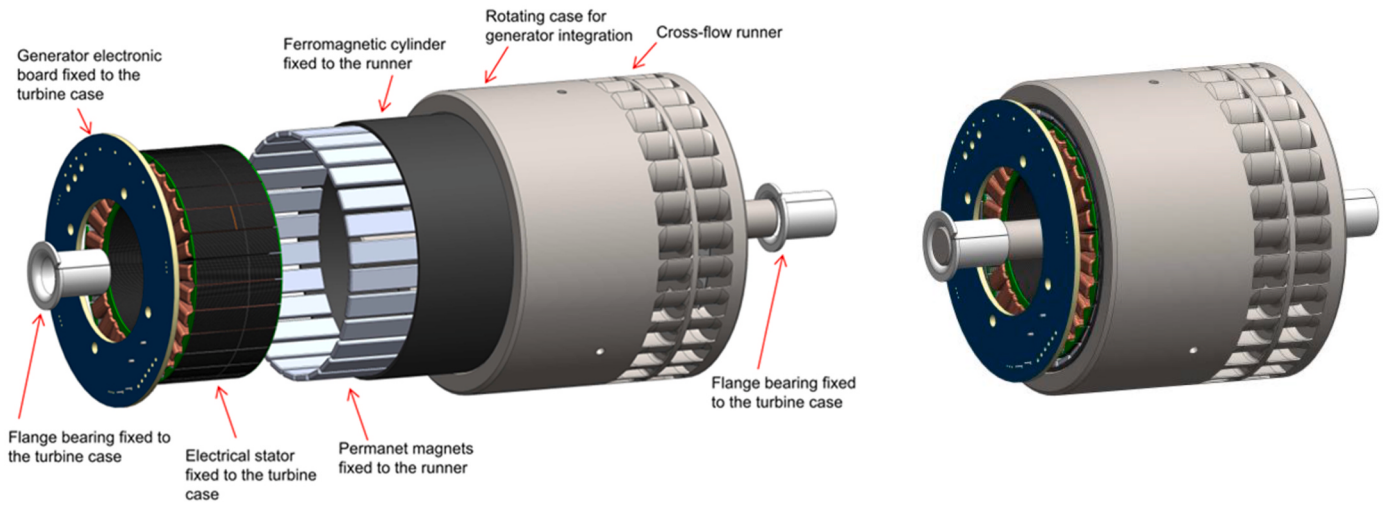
SWAMM sensor rotor components (exploded view in the left, assembled view in the right).
